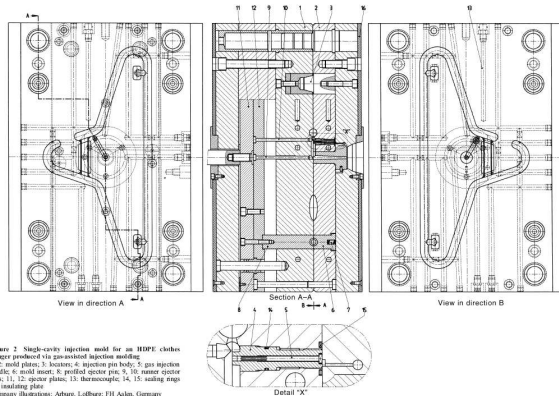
Single-cavity injection mold for an HDPE clothes hanger produced via gas-assisted injection molding. 1, 2: mold plates; 3: bushing; 4: injection pin body; 5: gas injection needle; 6: mold insert; 7: profiled sprue pin; 8: runner ejector pins; 9, 10: sprue ejector pins; 11: bushing; 12: cooling plate; 13: bushing; 14, 15: cooling plate. Company illustration: Ashurg, Lötzbach, T.H. Aachen, Germany
